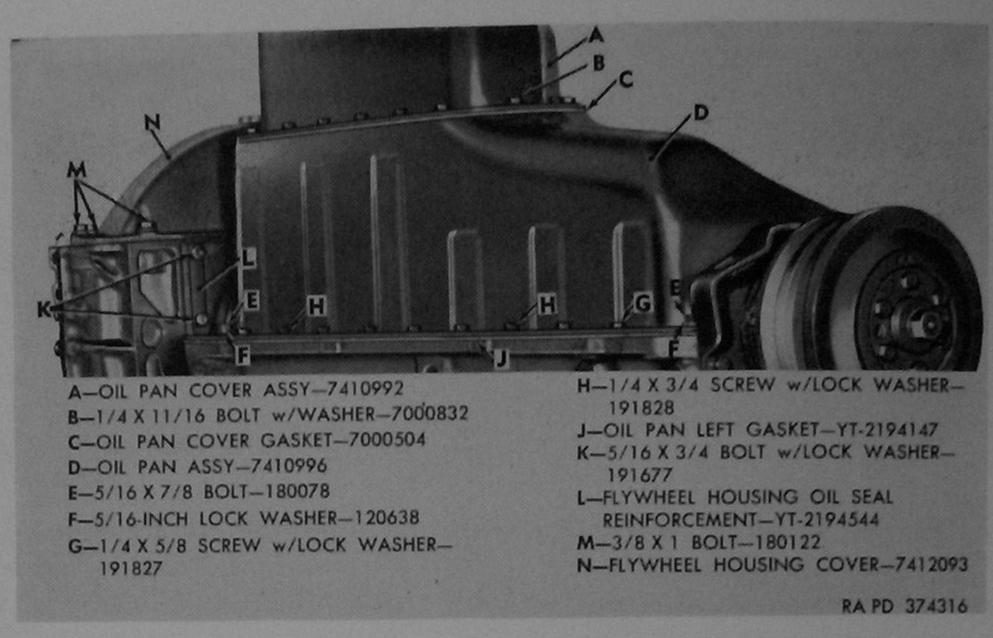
Oil pan and cover, and flywheel housing cover installed—engine assembly 7411599.
